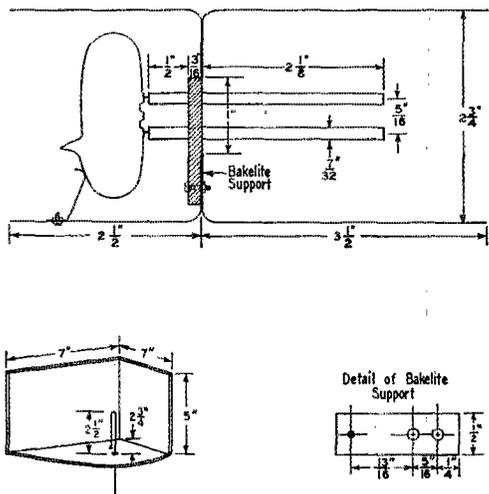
Detail drawing of the 703A oscillator and antenna assemblies.
